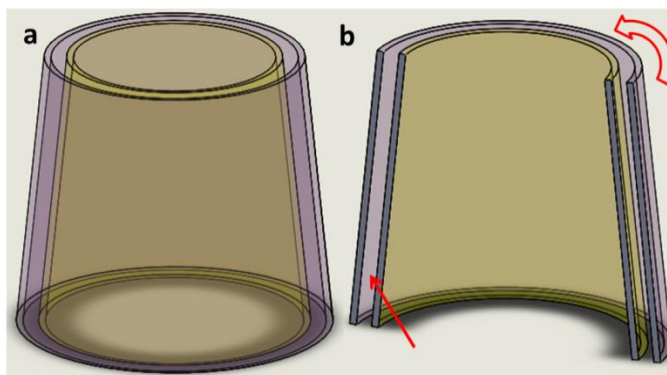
The rotating holder for shearing grease. (a) Dimetric view and (b) Section view of rotating holder.
